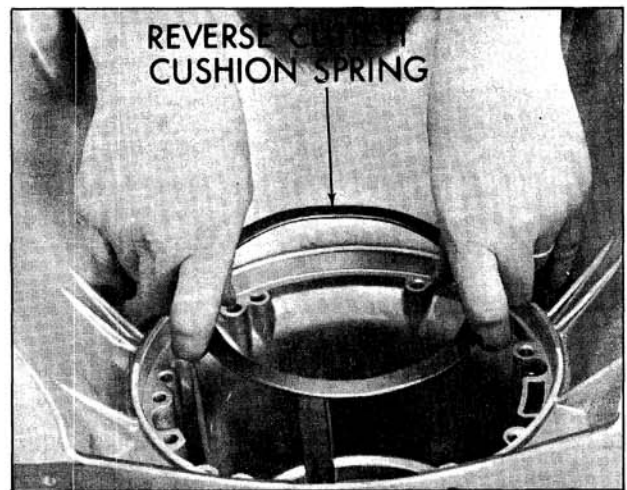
Removing Reverse Clutch Cushion Spring
